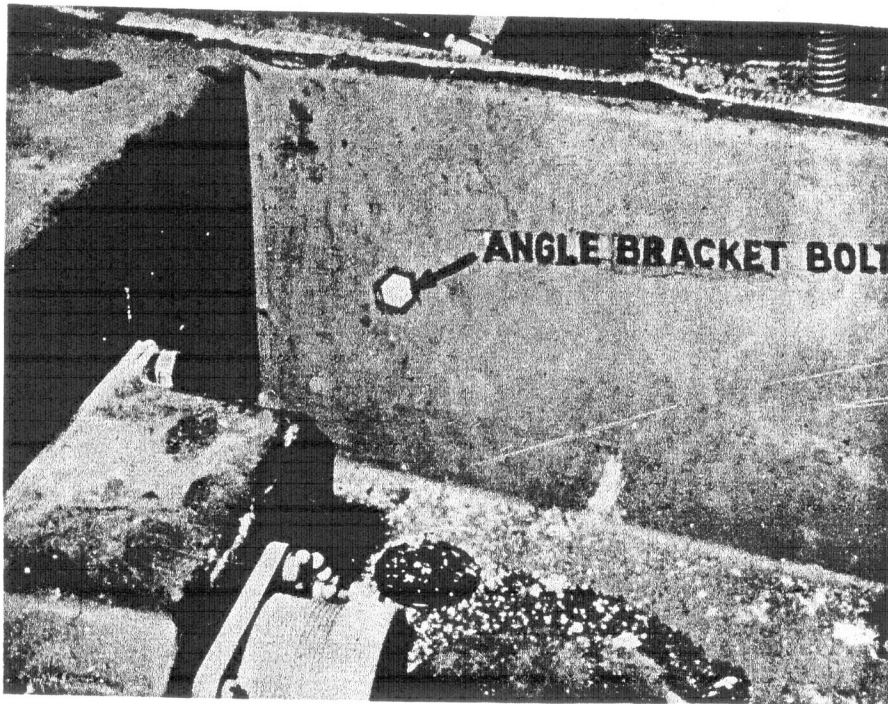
STEERING COLUMN SHAFT ENTERING CAB FLOOR
